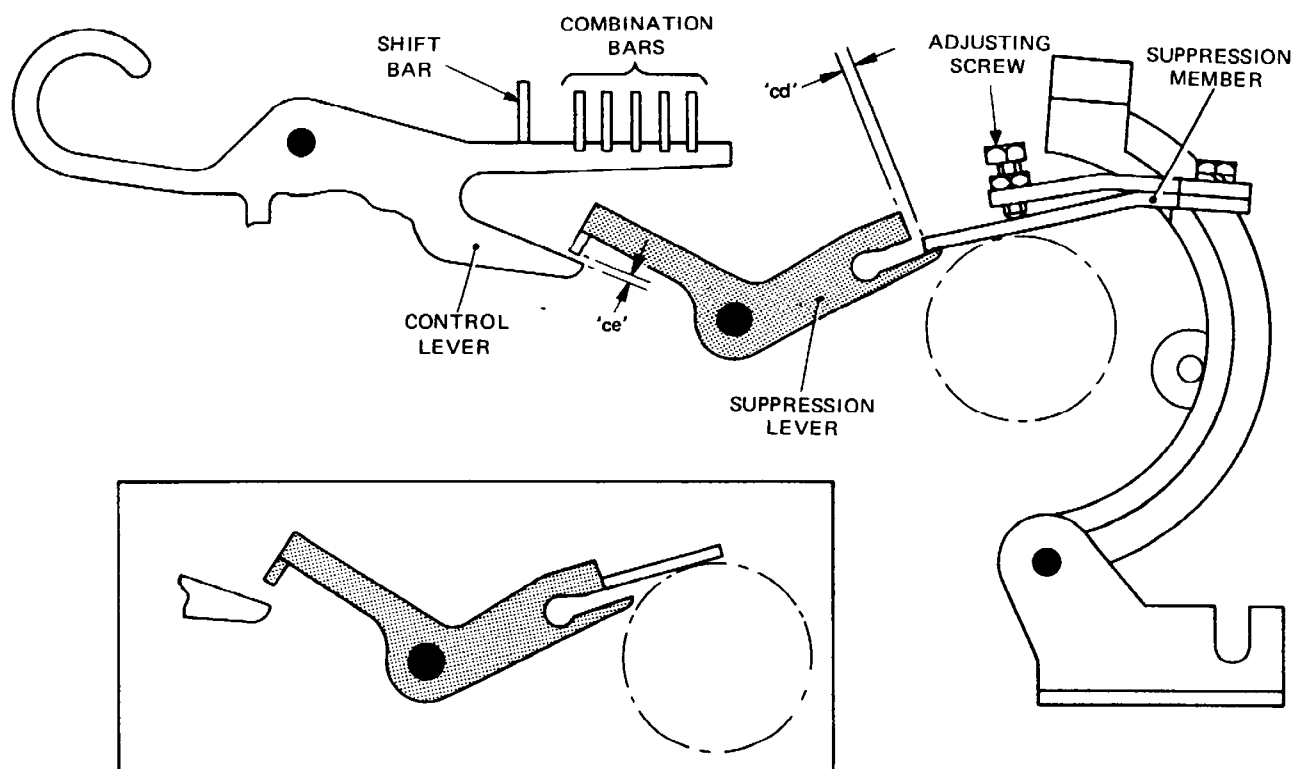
PRINT SUPPRESSION MECHANISM
